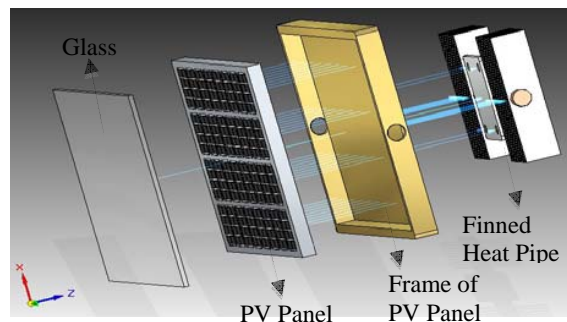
Exploded view of the proposed finned heat pipe arrangement
